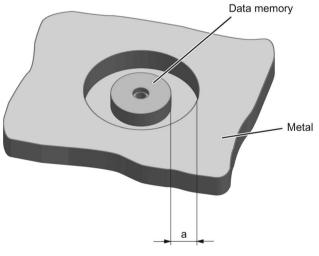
Flush-mounting of the MDS D423 in metal with 10 mm clearance
